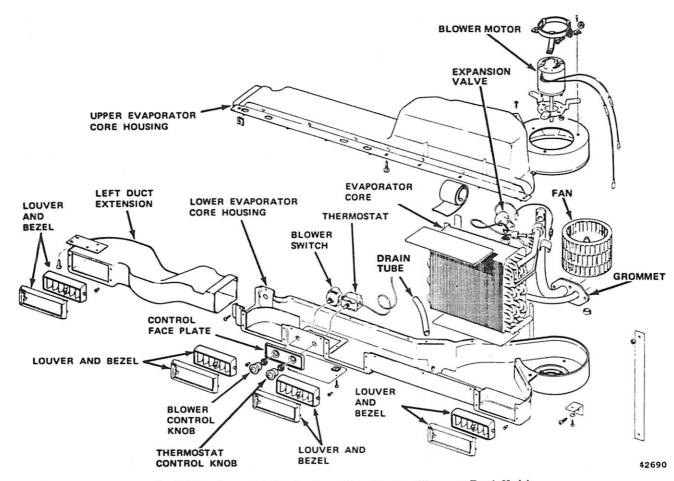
E-11 Evaporator Housing Assembly—Cherokee-Wagoneer-Truck Models
